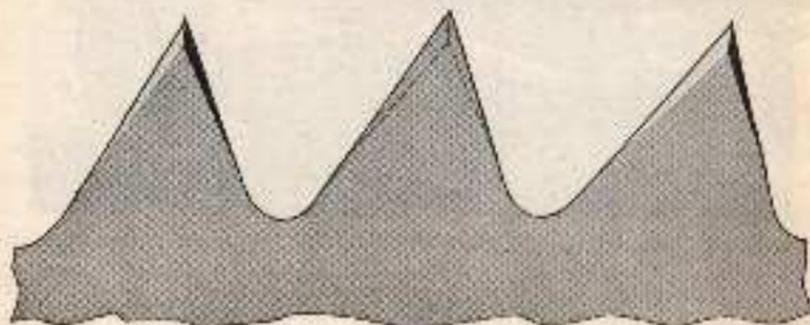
Bevel and angle of teeth of circular cross-cut saw for hardwood, magnified.
